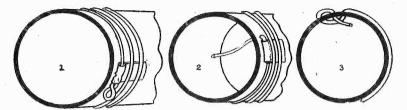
Suggested method of fastening the first turn of the winding in order to prevent working loose. A strip of adhesive tape will do nicely.
